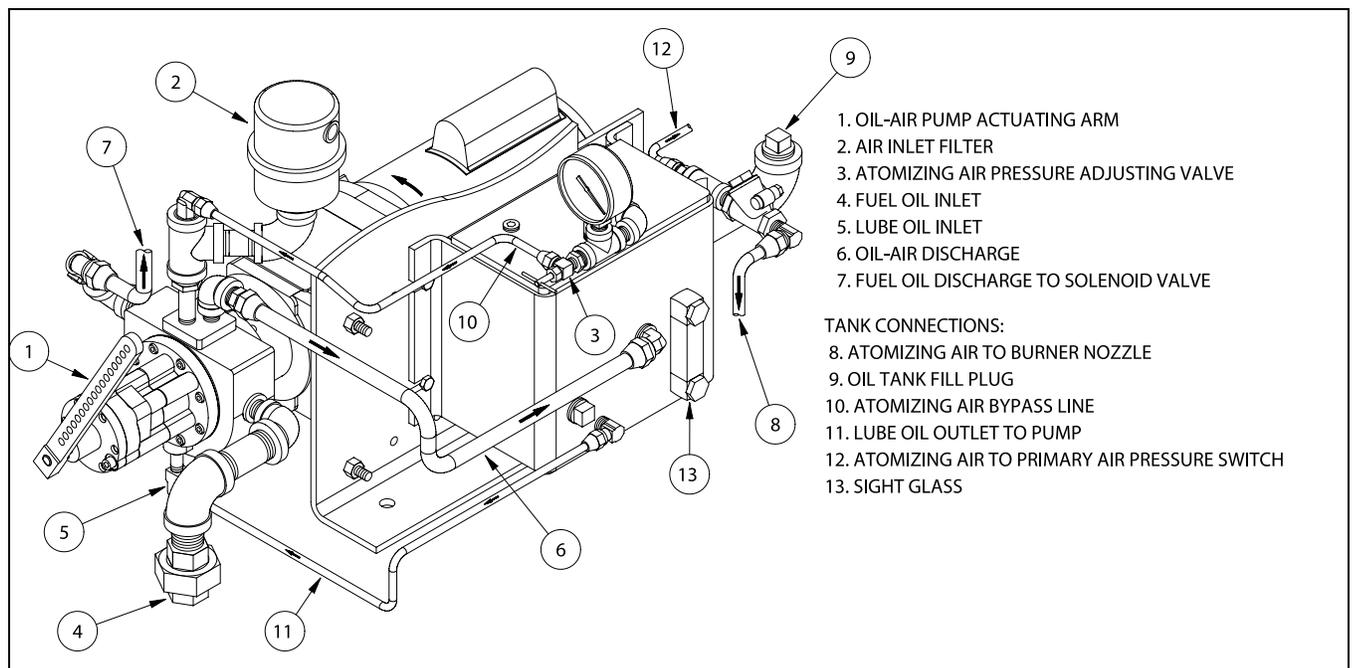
Oil Metering Pump and Tank Assembly, Integral Compressor
